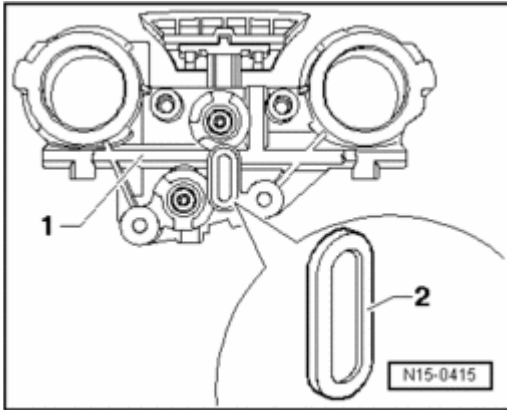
Checking Filter Of Valve Timing Housing For Dirt
